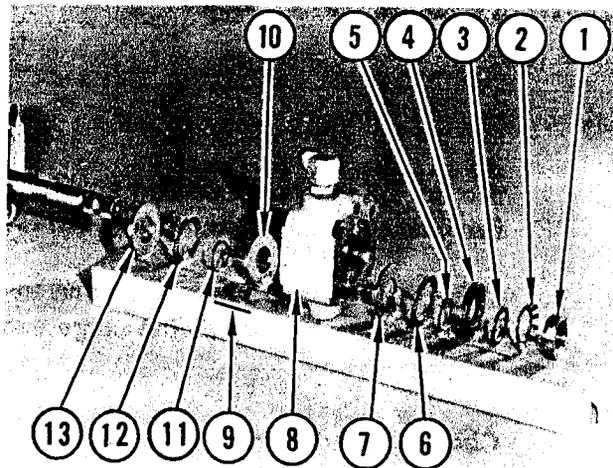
EXPLODED VIEW OF CONTROL VALVE
